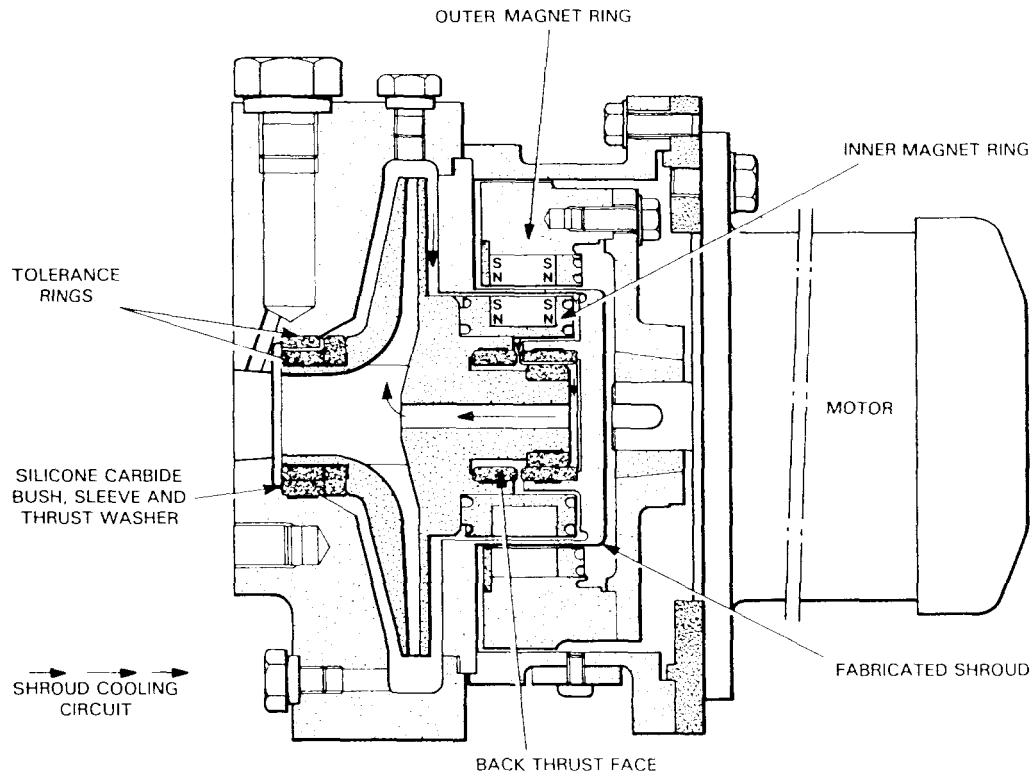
BRINE EXTRACTION PUMP WITH MAGNETIC DRIVE
